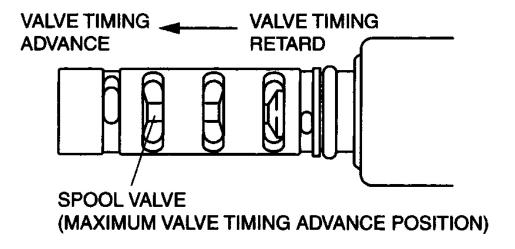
Identifying Spool Valve Courtesy of MAZDA MOTORS CORP.
